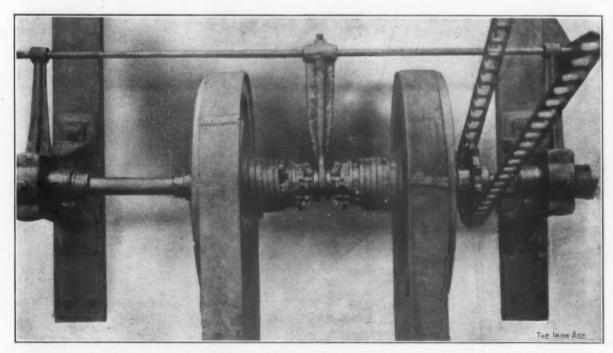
A Combination of Two Double Friction Coil Clutches Alternately Eugaged by One Shifter to Give Direct and Reverse Drives.
